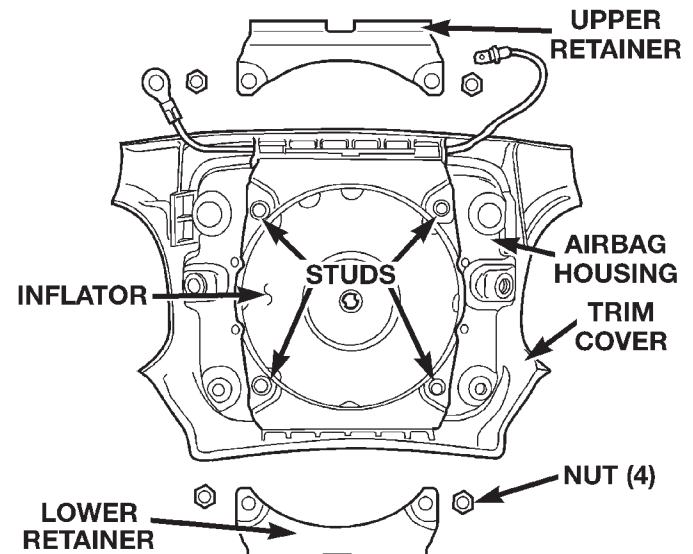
Airbag Trim Cover Retainers Remove/Install
